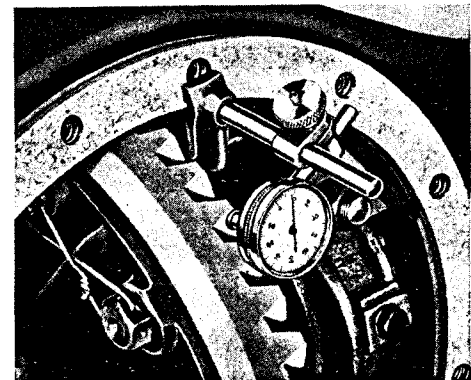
Checking backlash between ring gear and drive pinion with dial indicator and holder, tool No. HM-91220. Backlash should be .004 to .012 in. in Cadillac cars. On LaSalle cars the amount of backlash should correspond to the number etched on the end of the pinion gear.
